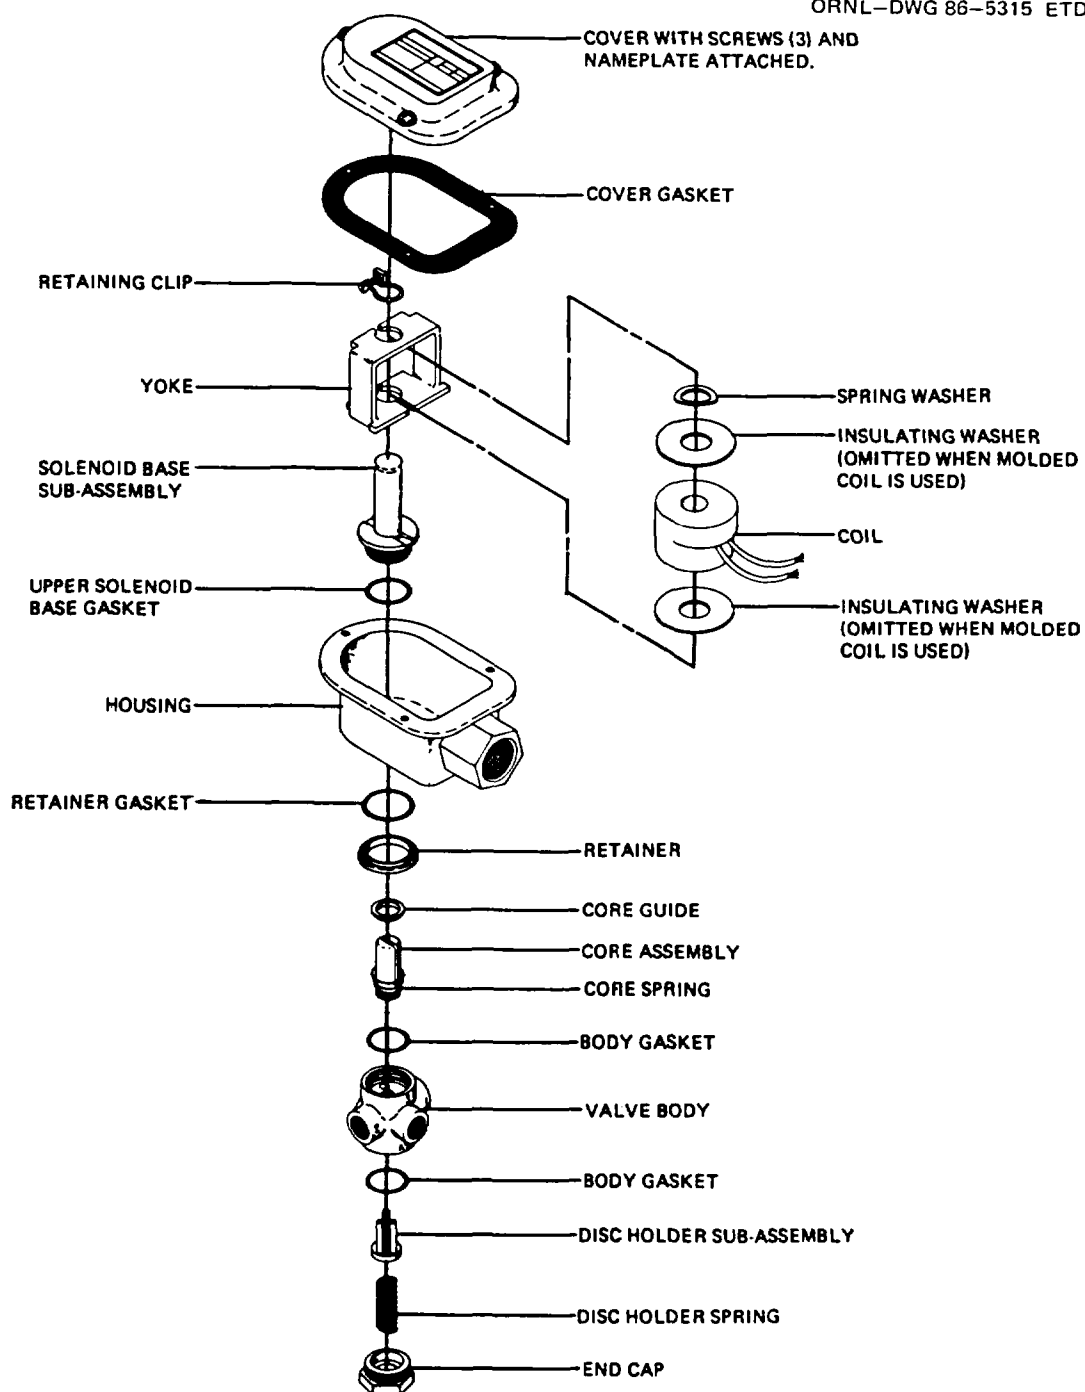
Exploded view of ASCO direct-acting, three-way valve.
